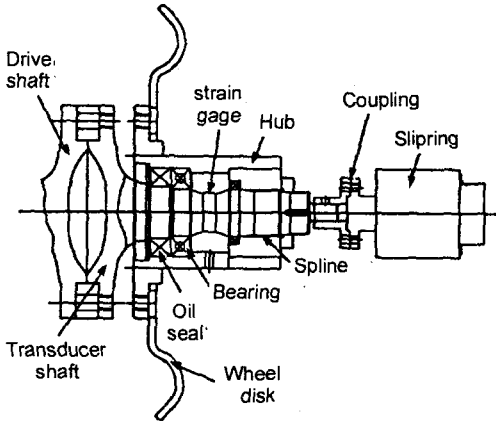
Wheel torque meter mounted on driving wheel shaft.
